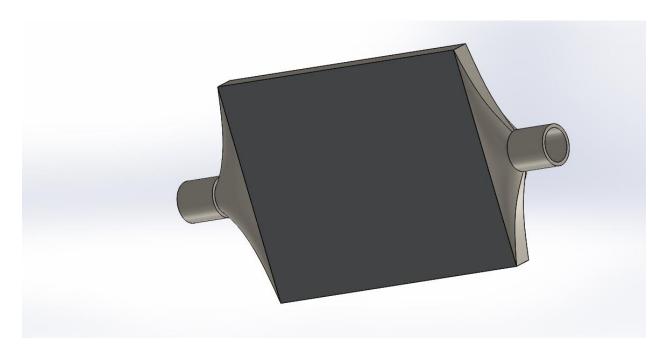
Diverging-Converging shell type heat exchanger with no fins.
